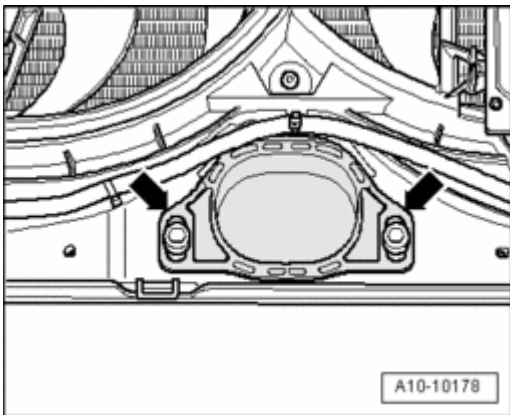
Placing Torque Support On Rubber Buffer For Torque Support And Tightening Bolts
